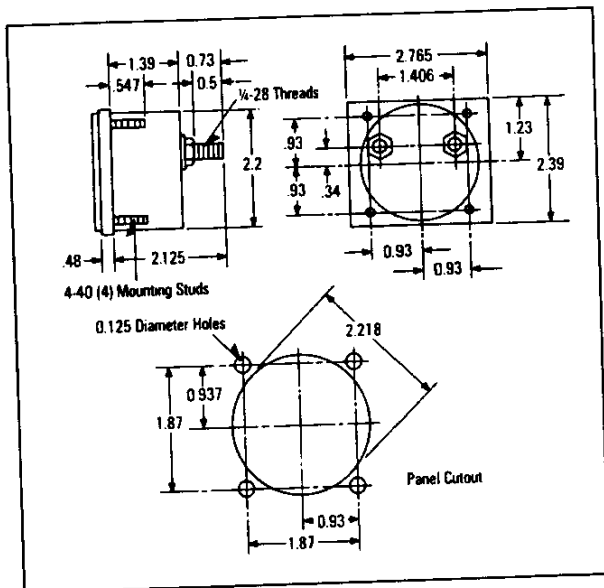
Outline Dimensions and Panel Cutout for Indicating Ammeter
